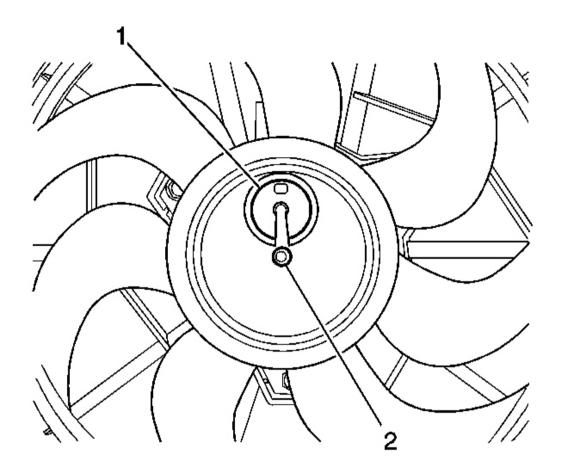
View Of Fan Retaining Clip From The Motor Shaft Courtesy of GENERAL MOTORS CORP.
